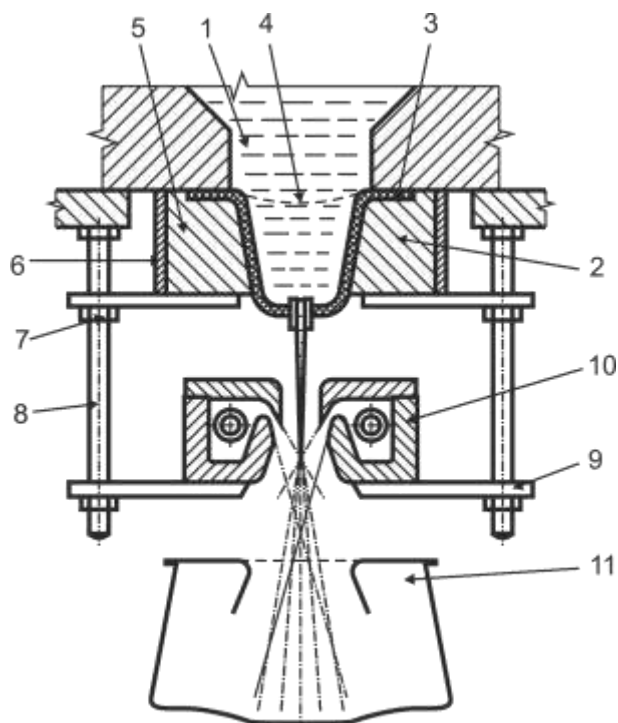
Platinum furnace with steam nozzle: 1 - hole in the feeder, 2 - platinum furnace, 3 - furnace connection flange, 4 - perforated lid, 5 - fireclay lining of the furnace, 6 - cover, 7 - furnace attachment nut, 8 - connecting screws, 9 - steam nozzle bottom plate, 10 - steam nozzle, 11 - diffuser
